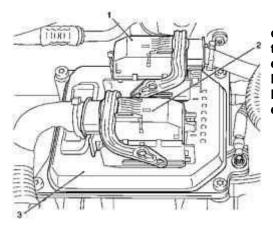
Simtec 75.1 electronic control module gasoline engine: 1 - the wiring harness connector - engine wiring harness, 2 - wiring harness connector - engine wiring harness, 3 - Simtec 75.1 electronic engine control module
